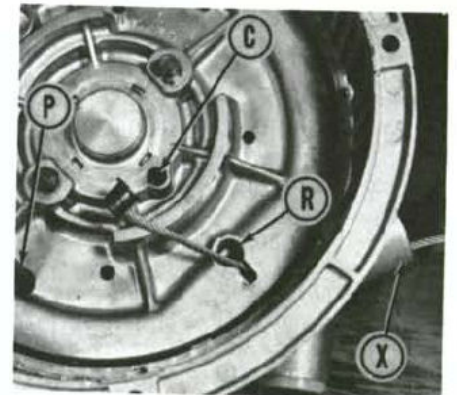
Opposite side of spring anchor hole (C) (See Fig. 23) permits insertion of punch for aligning spring end. Insert punch (P) and wind recoil spring completely; then back off until rope anchor hole (R) aligns with outlet hole (X) in housing. Insert rope cable from inside as shown.
